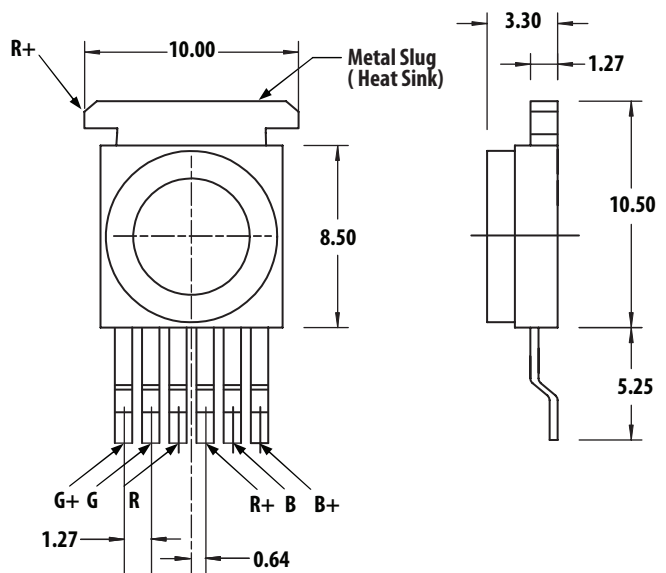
Outline drawing of the 3-in-1 RGB Moonstone LED package (ASMT-MT00), showing dimensions.
